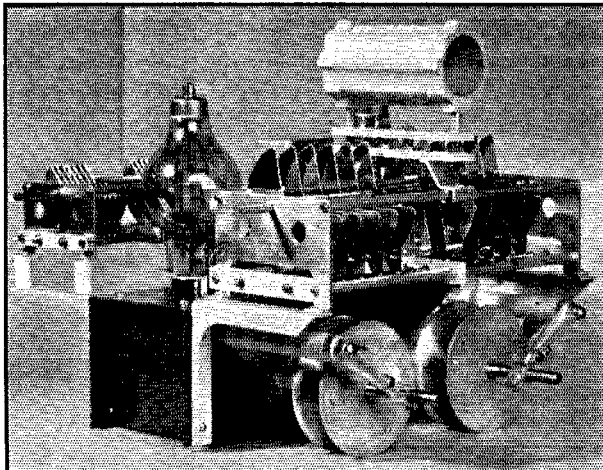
SIDE VIEW OF THE CHASSIS BEFORE WIRING
